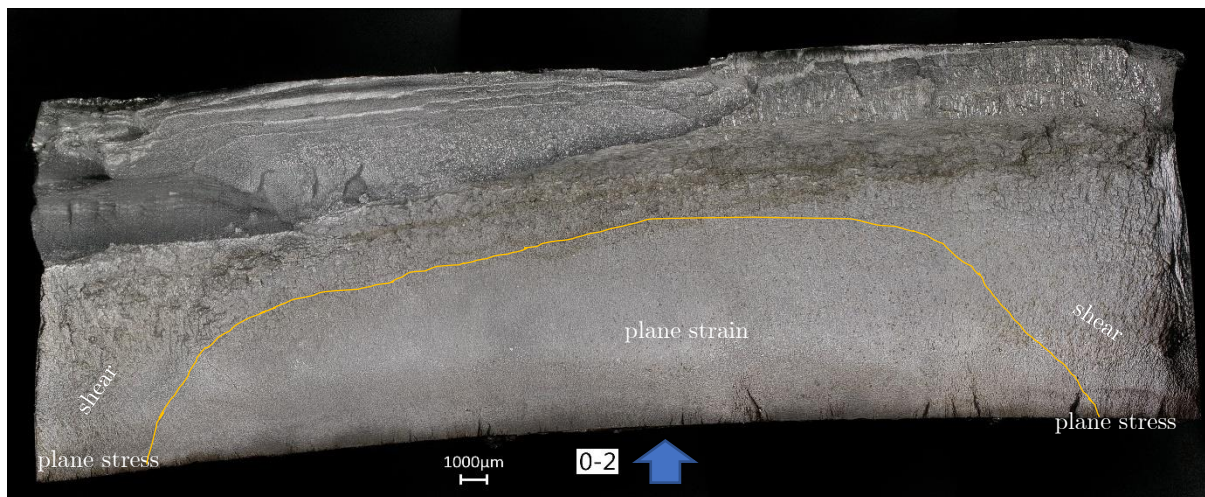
Fracture surface of specimen 0-2, magnification x20.
